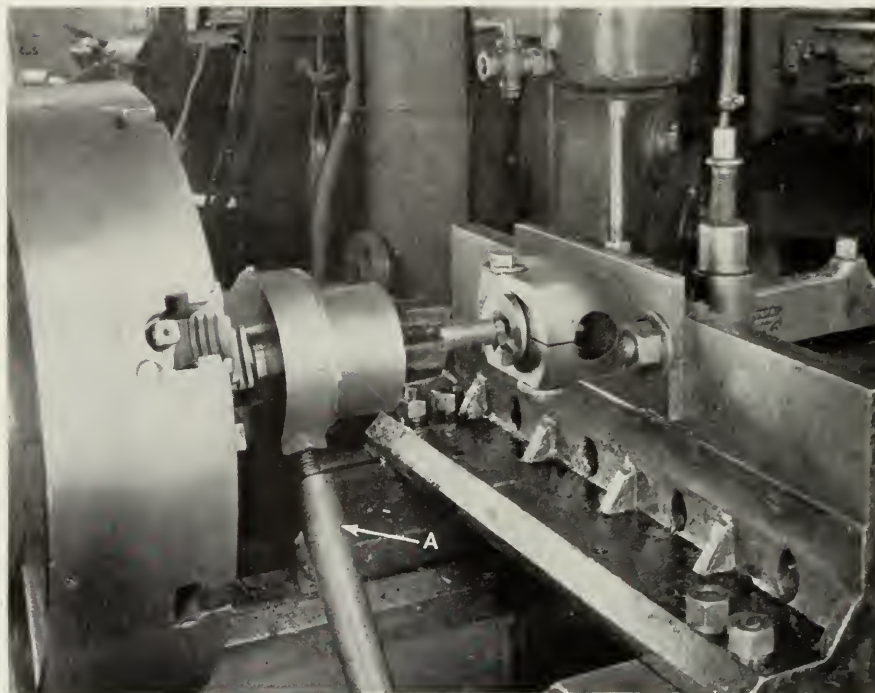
Set-up for 3-jaw starter clutch facing operation is an old lathe. At A is the brake which holds the stationary cam in place while the facing is done.
